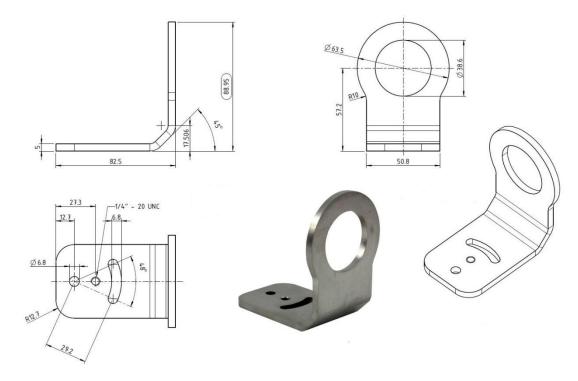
Drawing and Photo of Fixed Bracket (E-FB)
